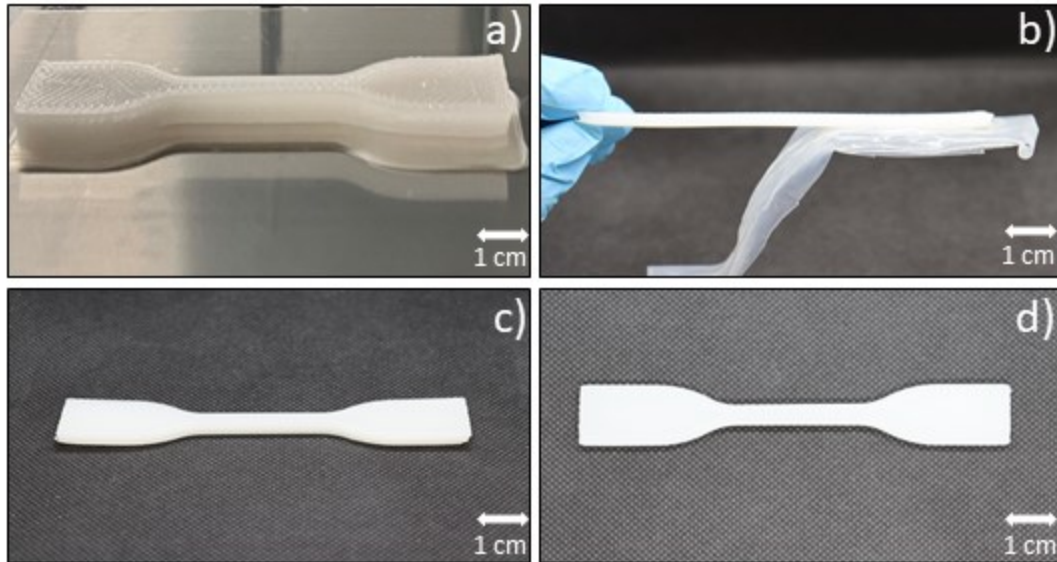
a) Printing of ASTM D638-IV test specimen, b) partial detachment from build plate, c) complete detachment from build plate by peeling it off with hand, d) ASTM D638 -IV test specimen reading for testing
